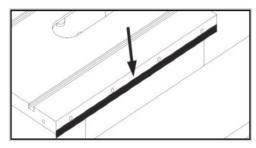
Masking Tape Location For Tilting The Extension Wing Up.
